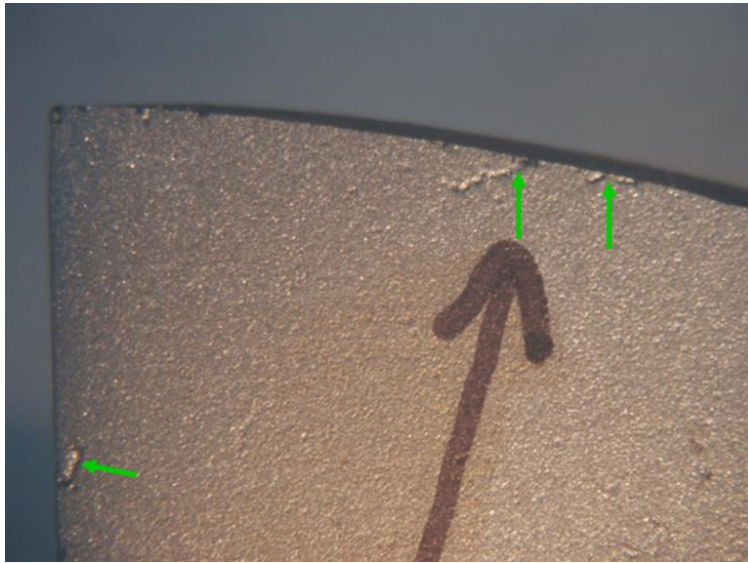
Side View of the Cracked Blade with Corrosion Pits
